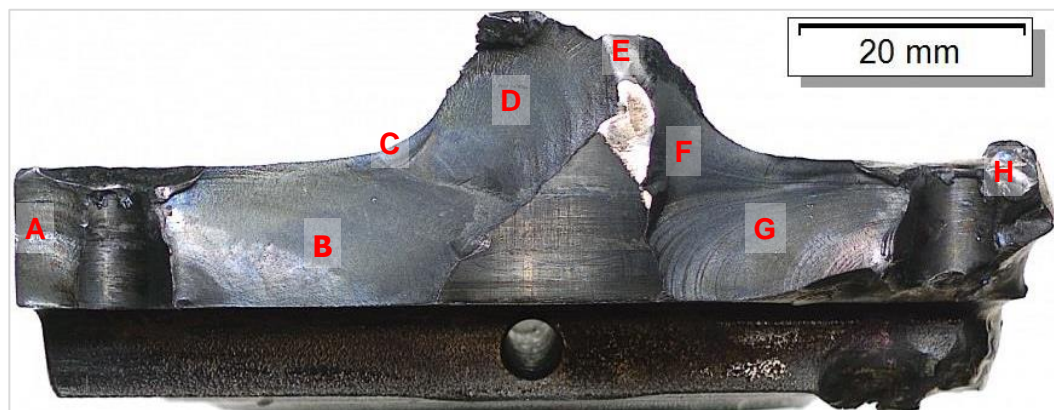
Fracture surface of the crankshaft web with the fatigue fracture surfaces in zones A, B, C, D and G (from left to right); it was not possible to analyse fracture zone H.
